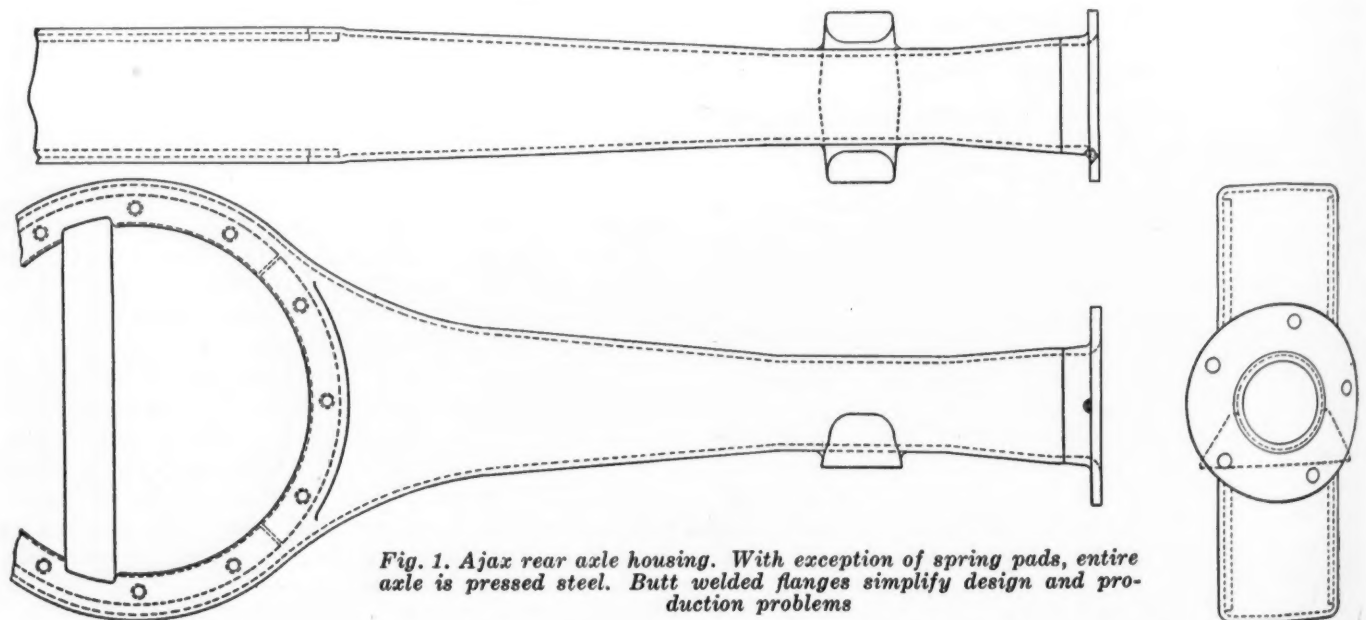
Ajax rear axle housing. With exception of spring pads, entire axle is pressed steel. Butt welded flanges simplify design and production problems
